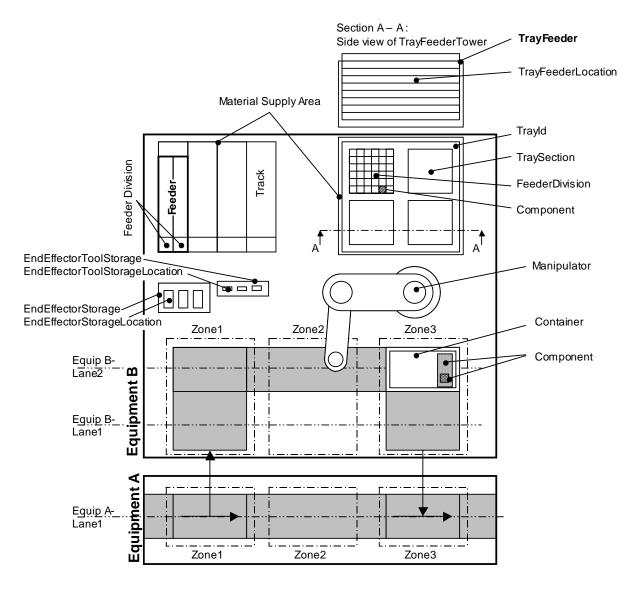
Abstract Model of Assembly Cell (=Equipment B) and Transporter module (=Equipment A)
